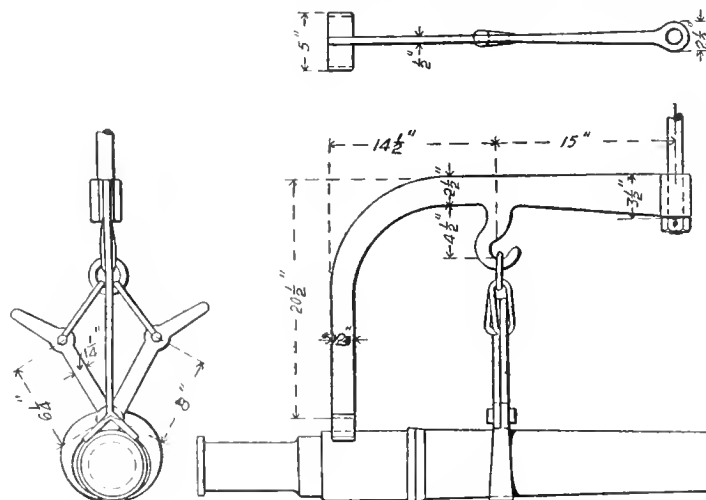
Hoist Attachment for Double Axle-Lathe.
